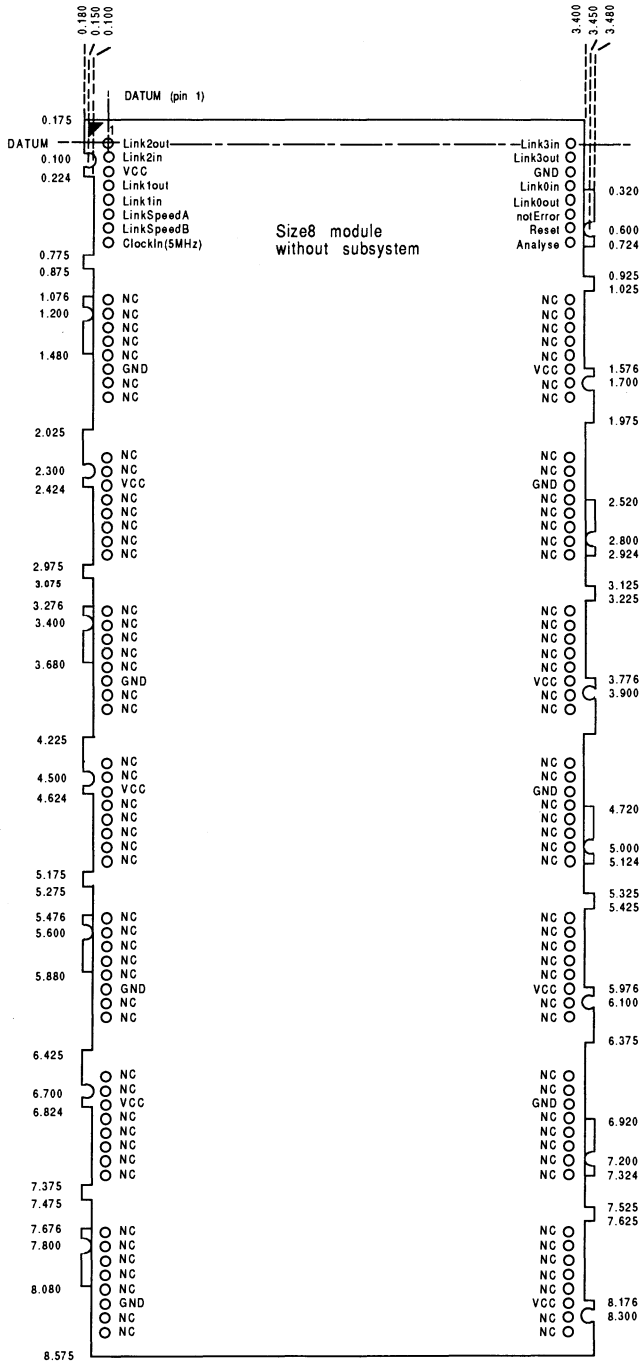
PCB profile drawing and pinout, TRAMs Size8 without subsystem
